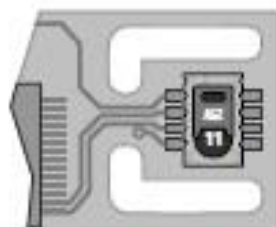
Top view of example of mounted SHT1x with slits milled into PCB to minimize heat transfer.
